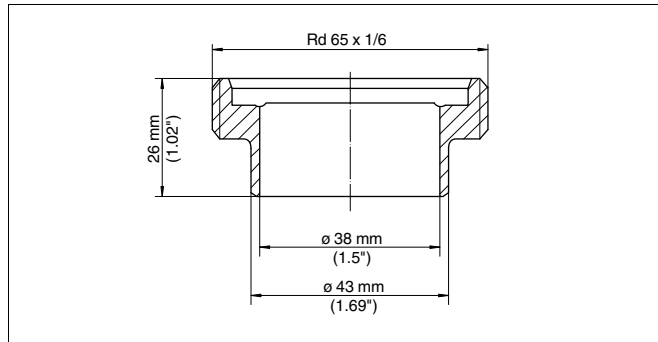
Dimensions welded socket DN 50 acc. to DIN 11864-1
